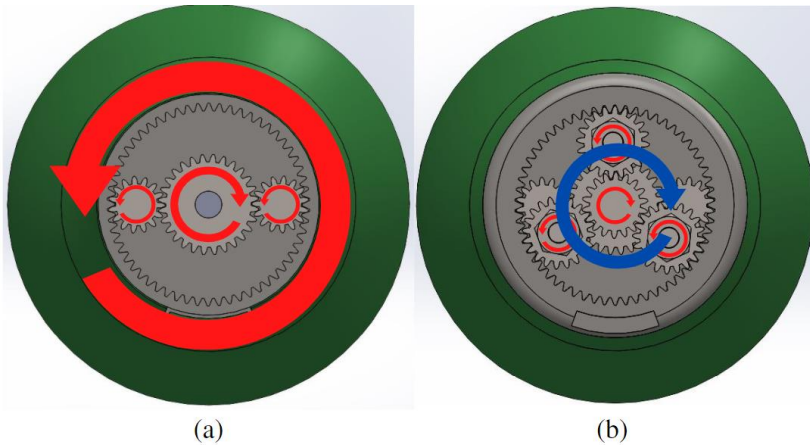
(a) First gear set's and (b) second gear set's movements. Both sun gears are designed to be in one shaft (see Figure 2).
